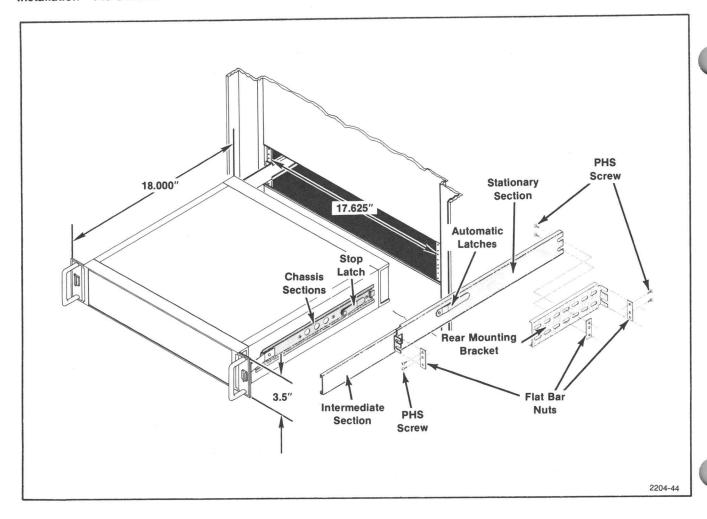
143 fully extended showing slide out tracks and dimensions.
